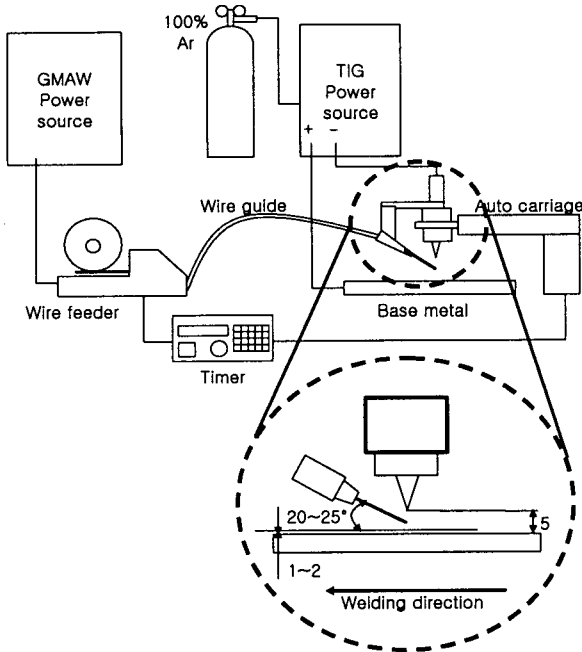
Schematic of filler wire TIG welding experiment
